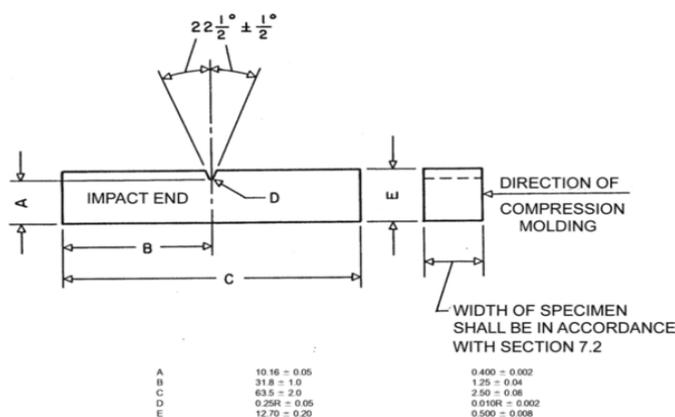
Dimension of the test samples in mm (ASTM D-526)
